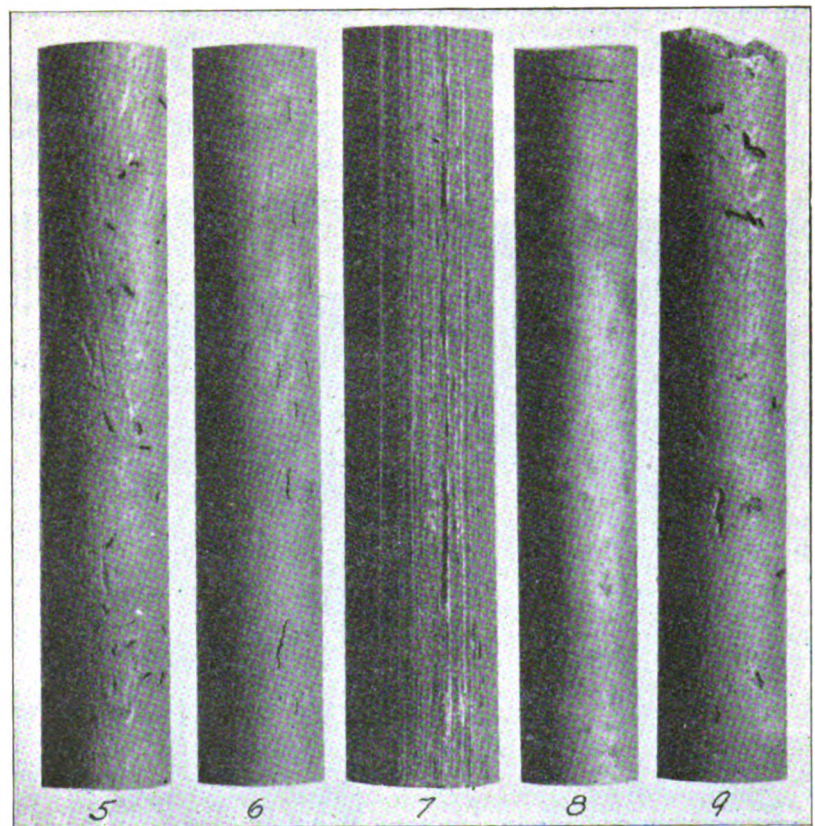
Photograph of a deeply etched bar showing many deep pits on the surface. FIG. 6—Photograph of a deeply etched bar showing fewer surface pits and cracks. FIG. 7—Photograph of a deeply etched rolled wrought iron bar showing a very rough surface resulting from the etching away of the elongated slag inclusions. FIG. 8—Photograph of a deeply etched sound bar showing an absence of pits and cracks with the exception of a minor fissure at the top of the bar which was caused by mechanically breaking the bar. FIG. 9—Photograph of a deeply etched bar showing very deep surface pits; photomicrograph of this bar is shown in Fig. 3.
